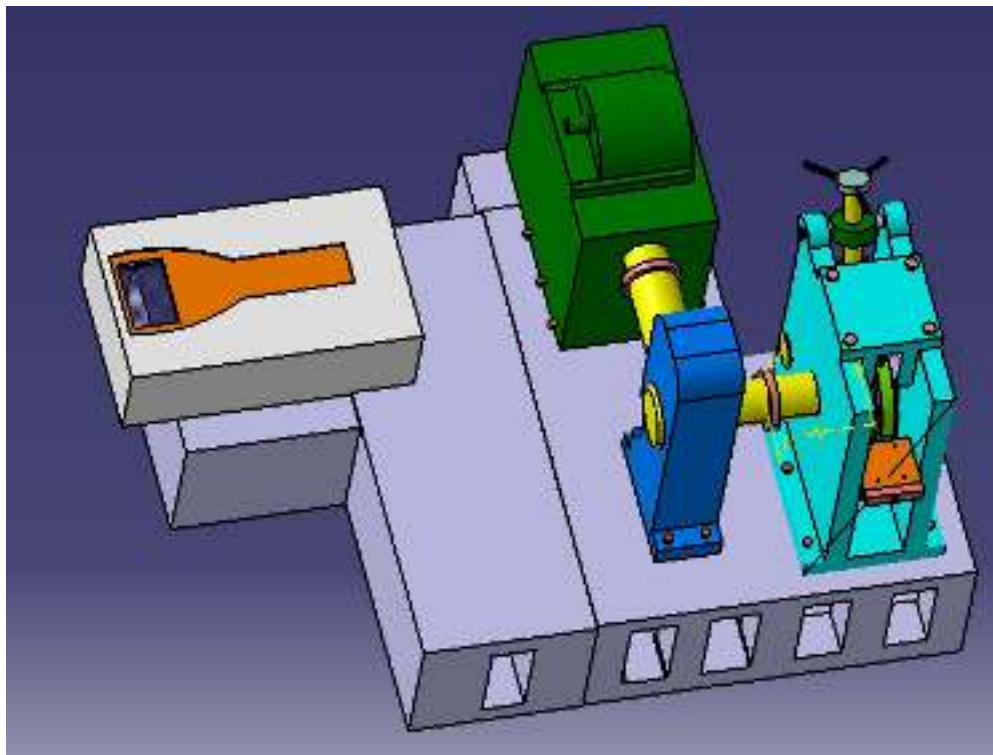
Schematic Diagram of Design Developed and Fabricated Continuous Extrusion Setup for 9.5 mm Aluminum feedstock material
